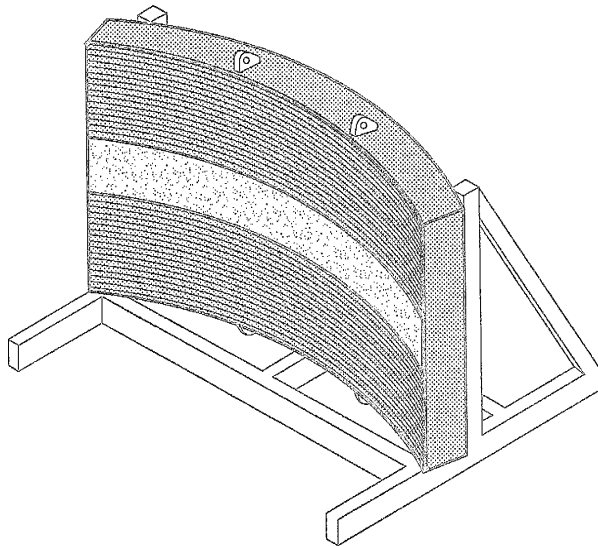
PWR Plate-to-Plate Weld, 5 X 8 feet, 11.25 inch Thick, Weight 8 tons. Flaws are Implanted in Shaded Area Which is Clad With Manually Ground SMAW Clad.
